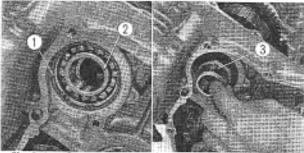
① 52 mm internal circlip ② 6205 ball bearing ③ 25 mm collar
